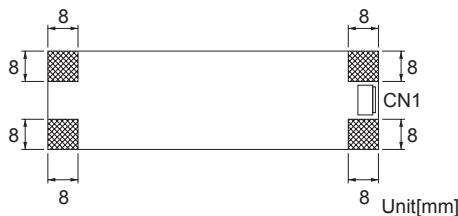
CR-HUT□-1 Allowance of metal for mounting
